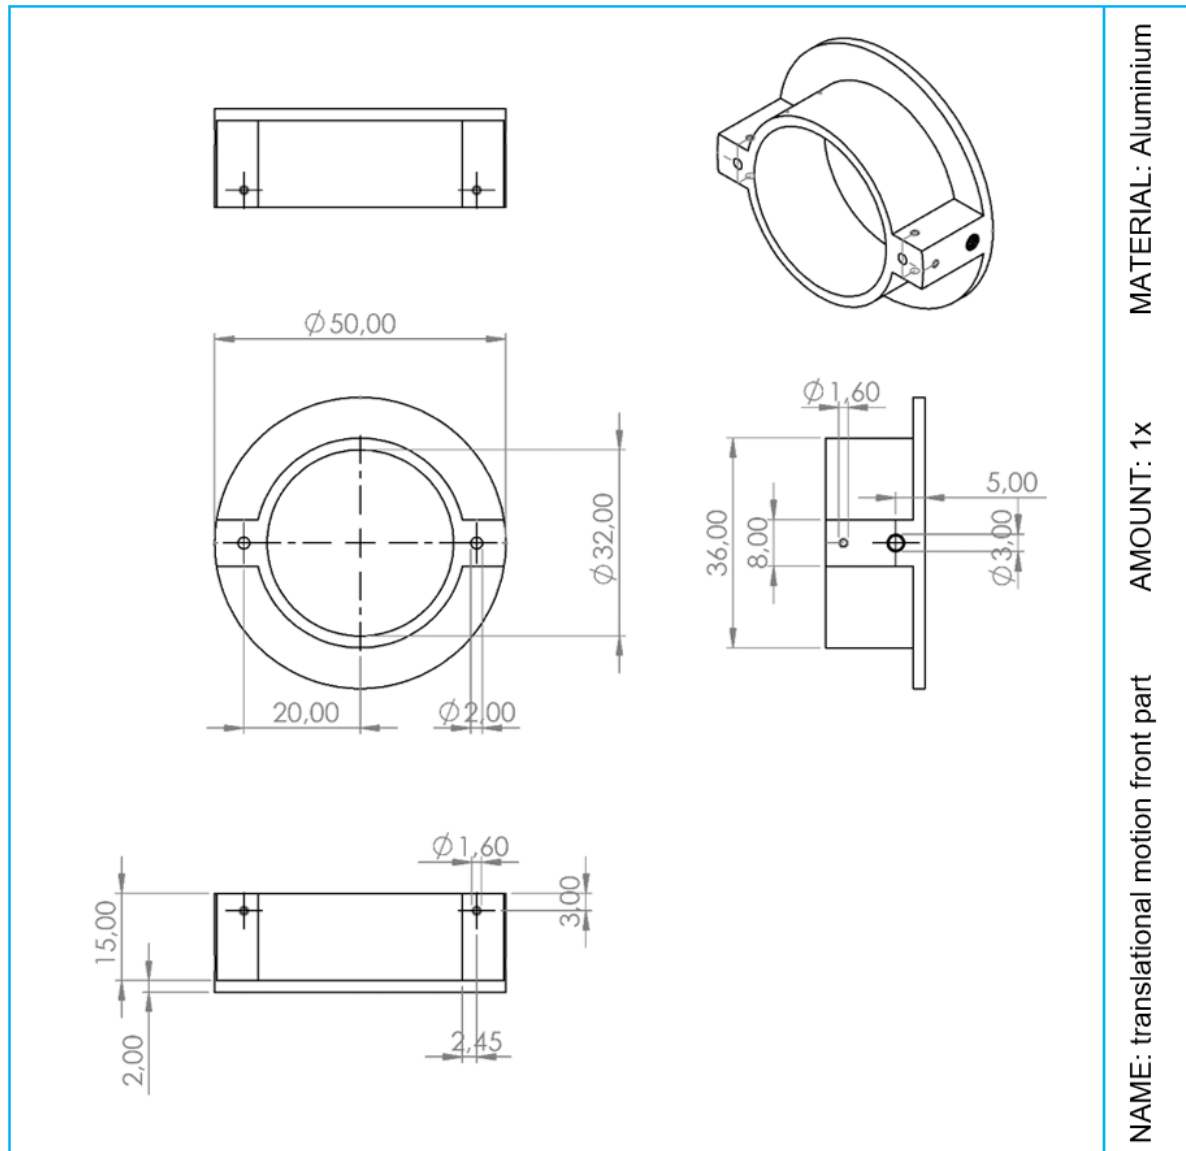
Construction drawings of the translational motion front part - Machined prototype
